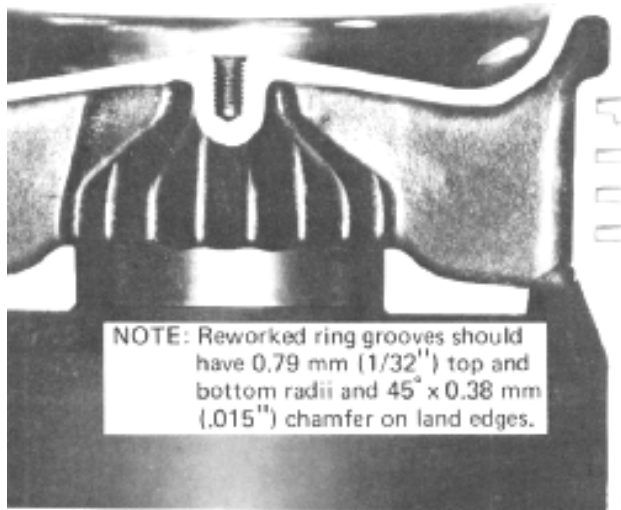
Typical Piston Ring Groove Wear Step
